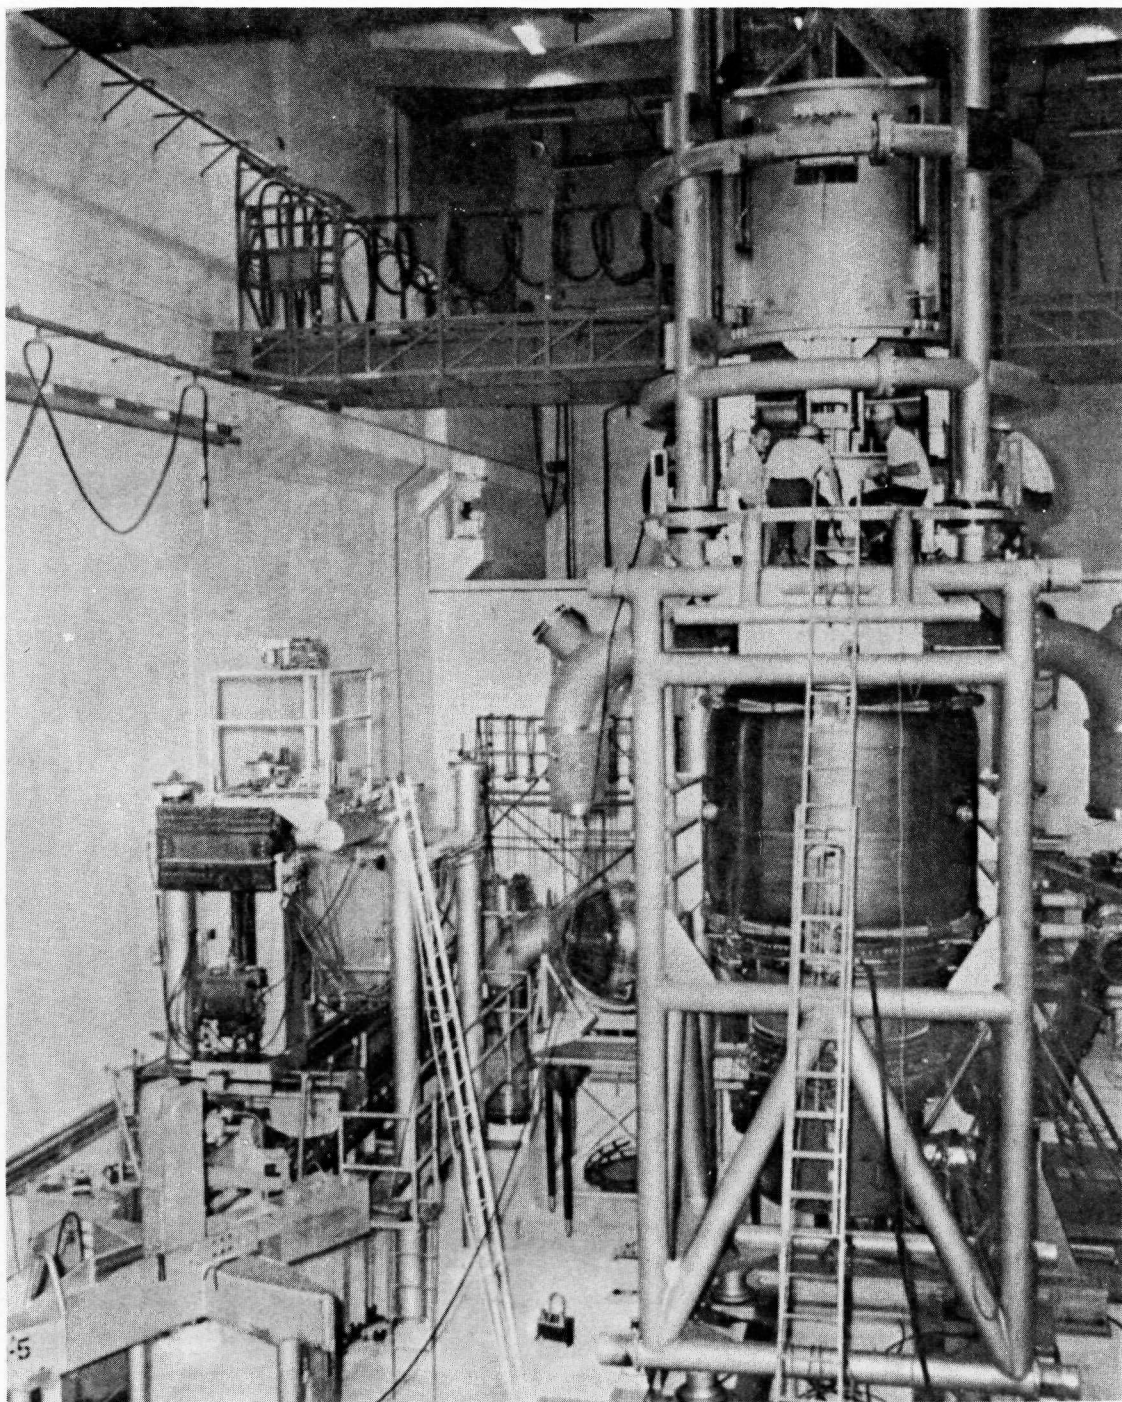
Core removal fixture on top of erection stand (C-14022)
